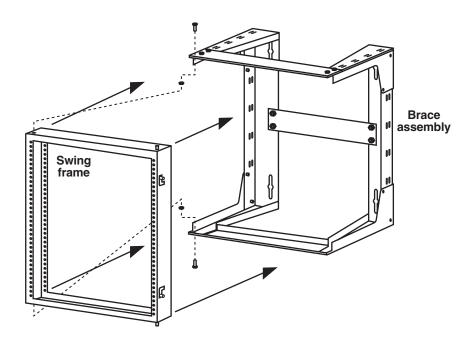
Final assembly (shown with swing frame oriented so locking pins are on right).
